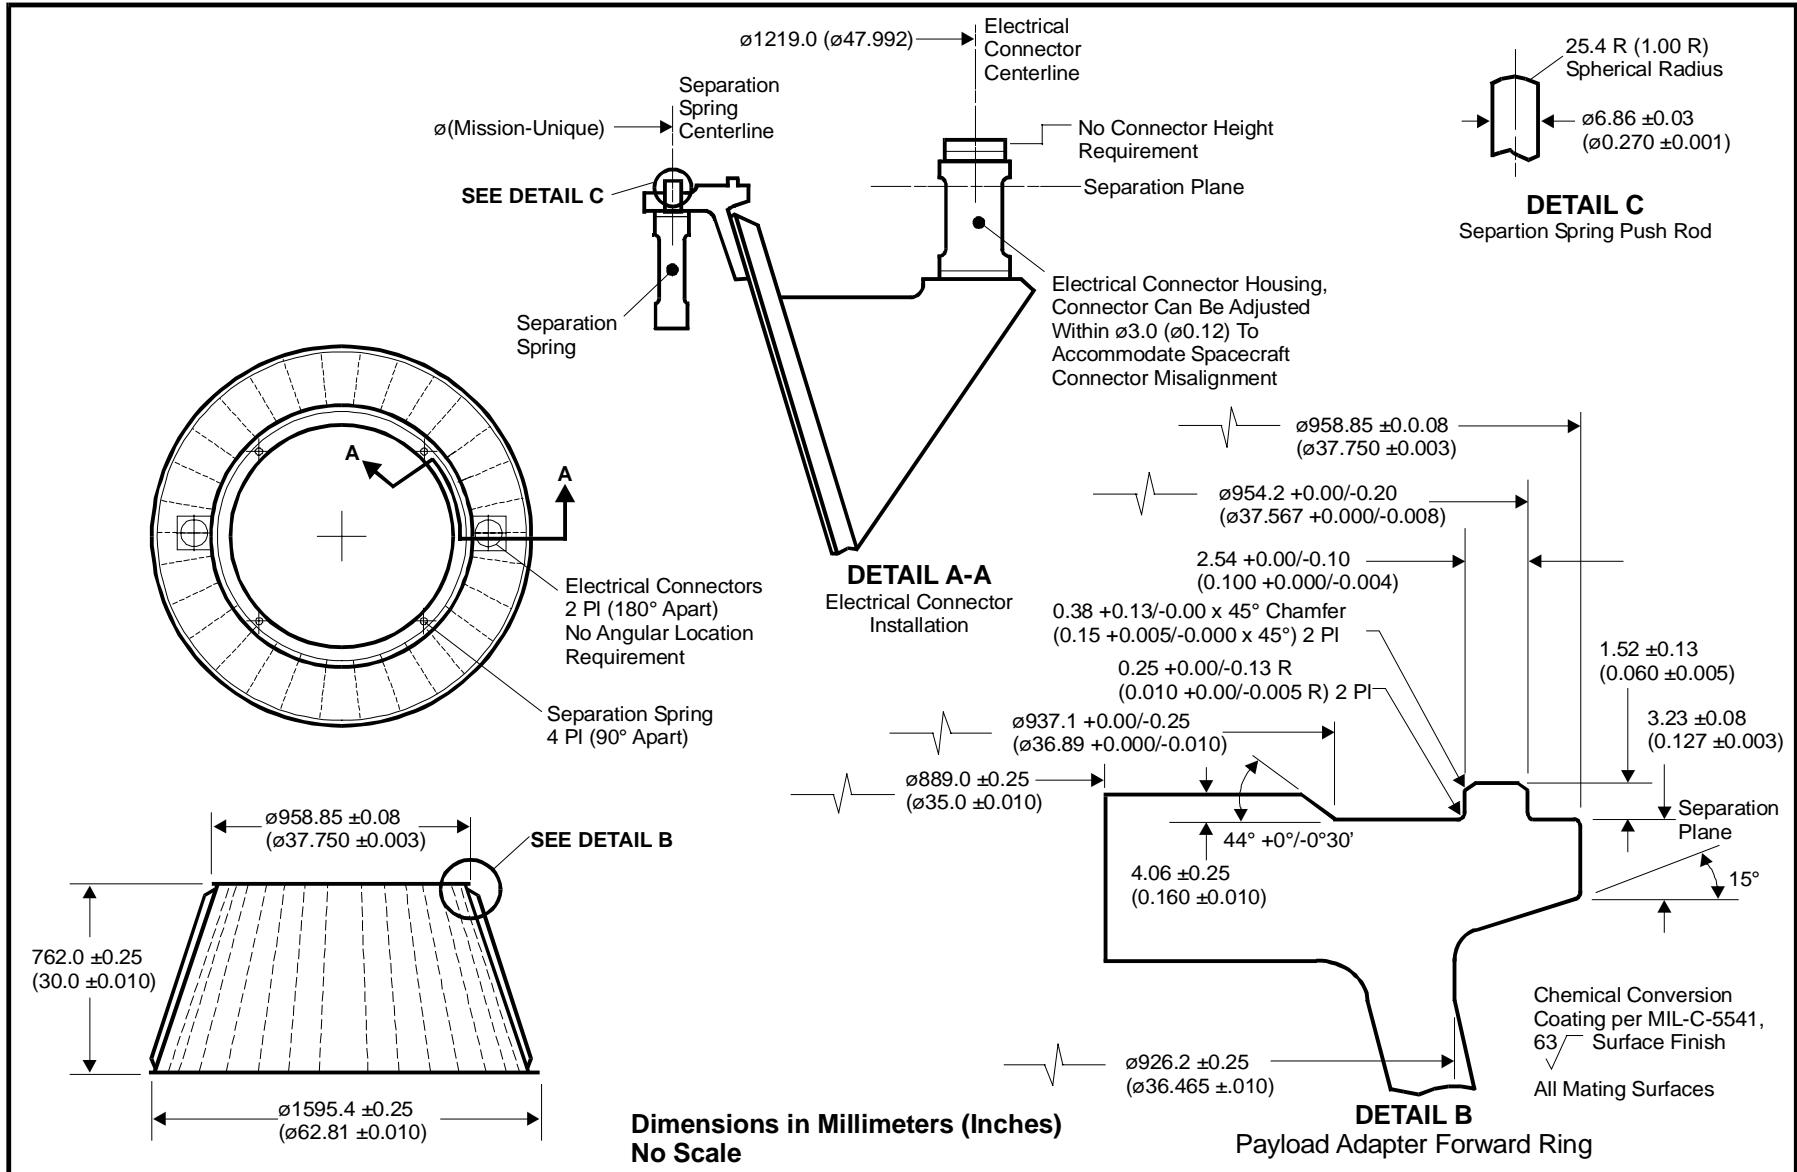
Type A1 Payload Adapter Mechanical Interfaces
